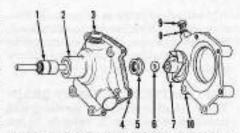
Exploded view of typical water pump showing component parts and their relative positions. Pump body design varies, but basic assembly is the same.
